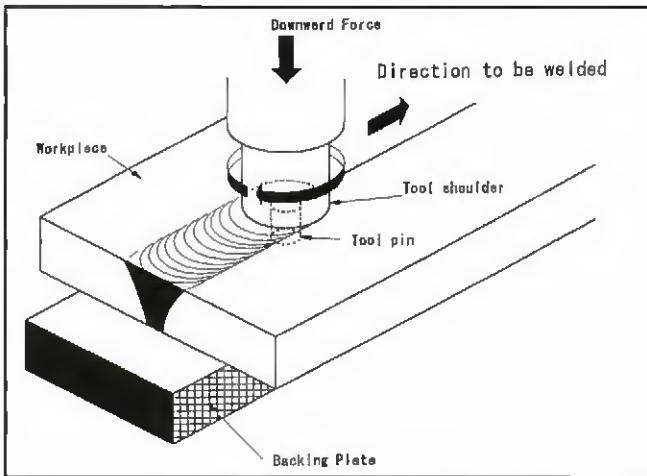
Principle of friction stir welding (FSW).
